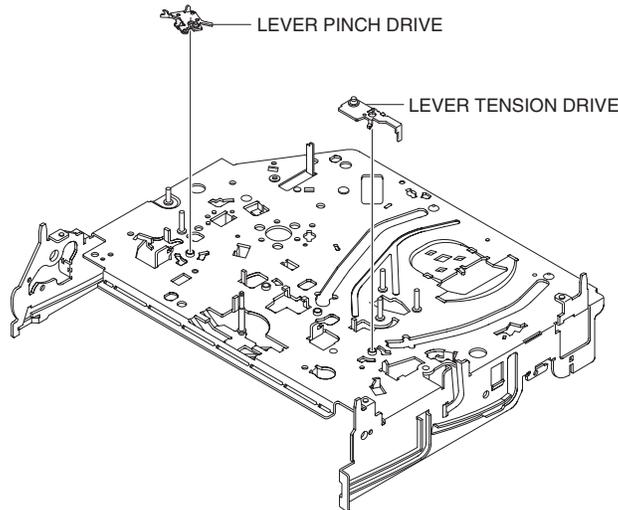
Lever Pinch Drive, Lever Tension Drive Removal
